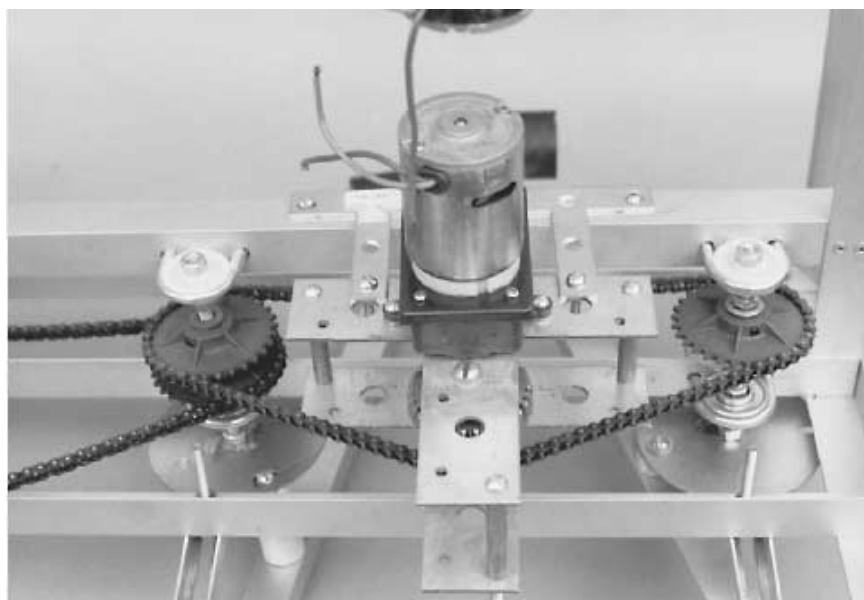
Drive motor attached to the Walkerbot, with drive chain joining the motor to the leg shafts.
